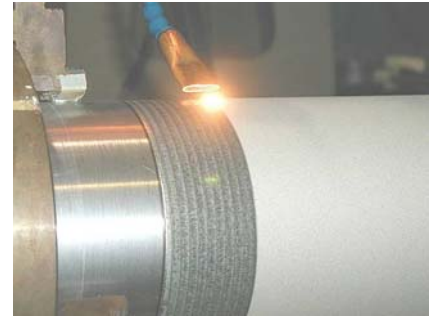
Laser fusion of a thermally sprayed coating (Force Technology)
